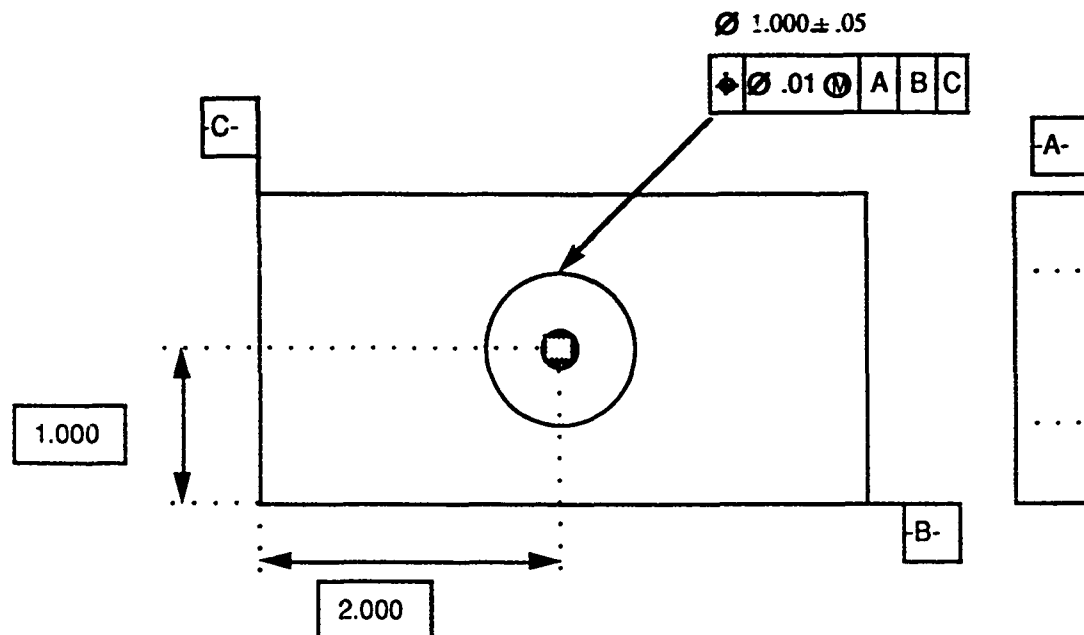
The Feature Control Frame shown in the upper right hand corner indicates a circular tolerance zone is being specified by the designer. The process engineer, however, will manufacture the part on a machine whose positional accuracies are specified along orthogonal axes. The square within the circular tolerance zone will determine the choice of machines.
